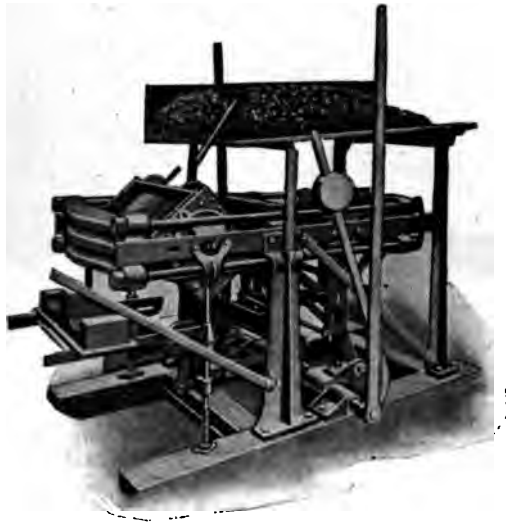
American Hydraulic Stone Pressure Block Machine.
